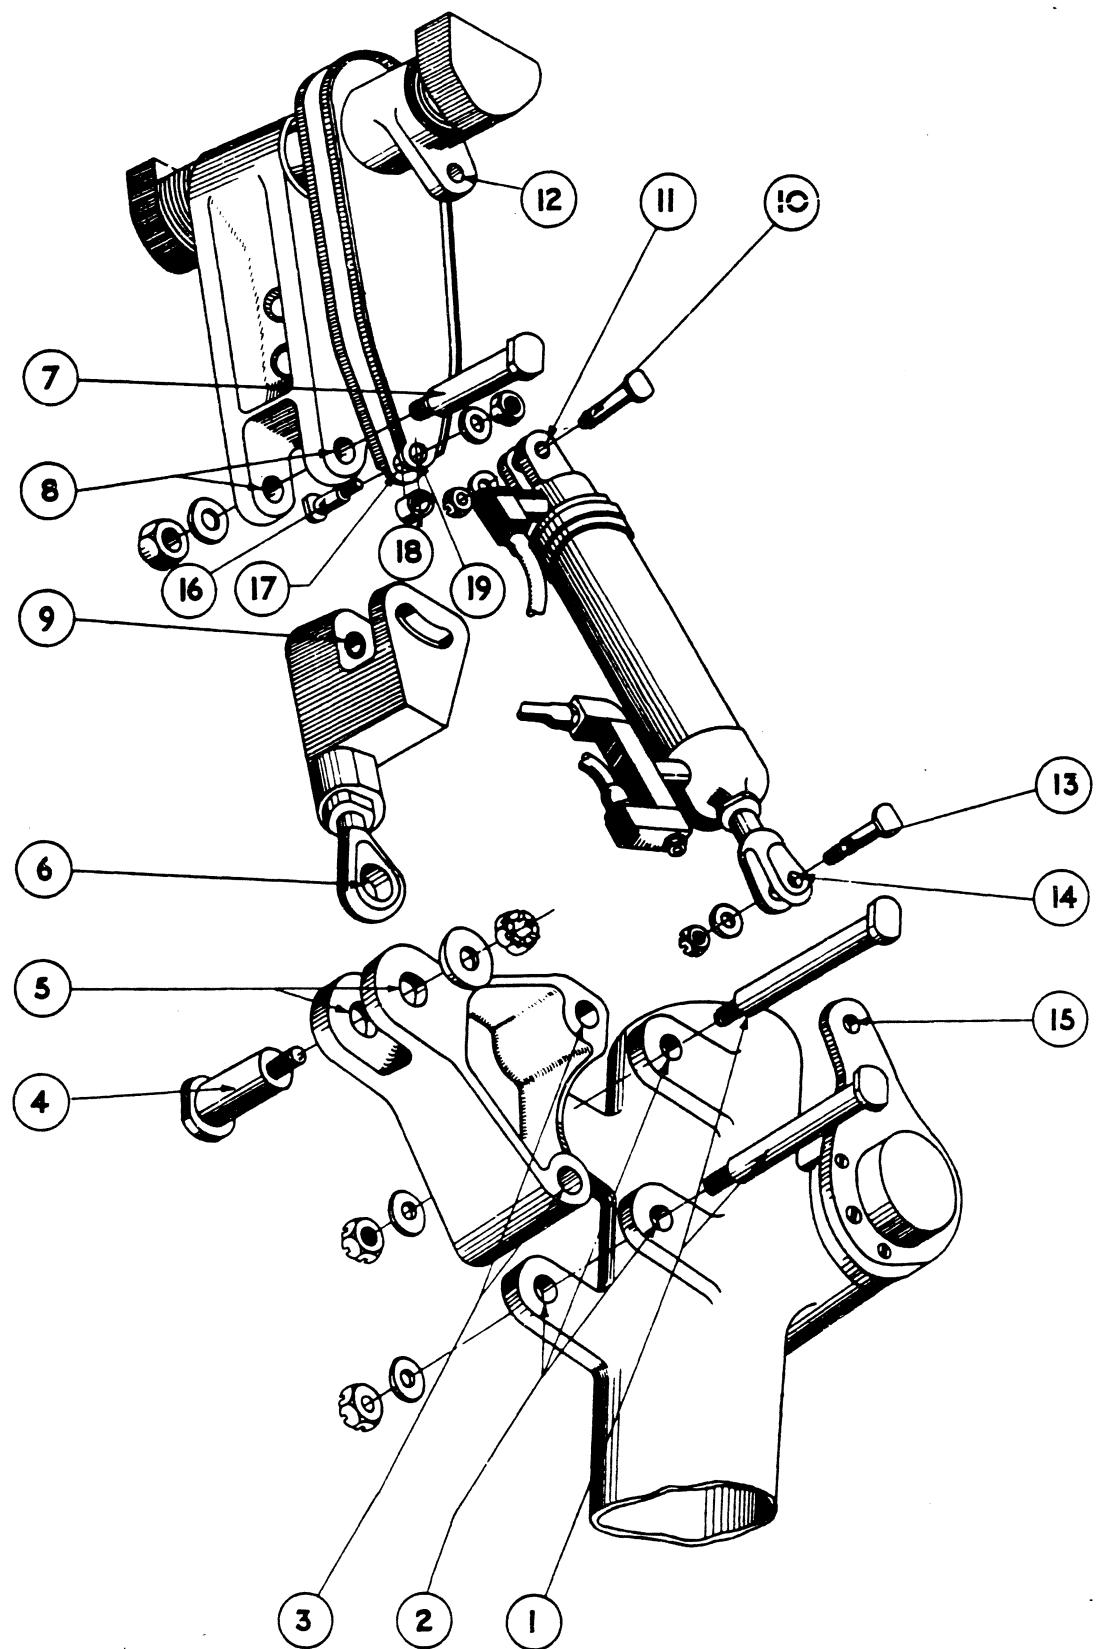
/3 EXPLODED VIEW OF UNDERCARRIAGE RETRACTING MECHANISM
